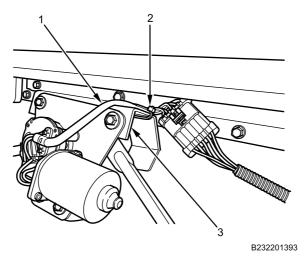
Windshield Wiper Motor Harness Cable Lock Strap.
